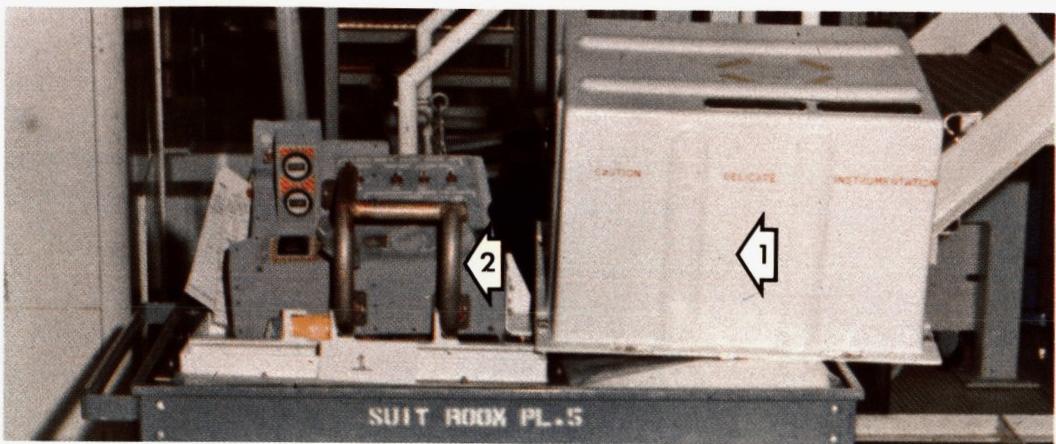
The dust cover (1) has been removed to show the handling fixture (2) that is affixed to aid in lifting the panel assembly; however, the handling aid should be distinctively colored and marked "Remove Before Flight."
